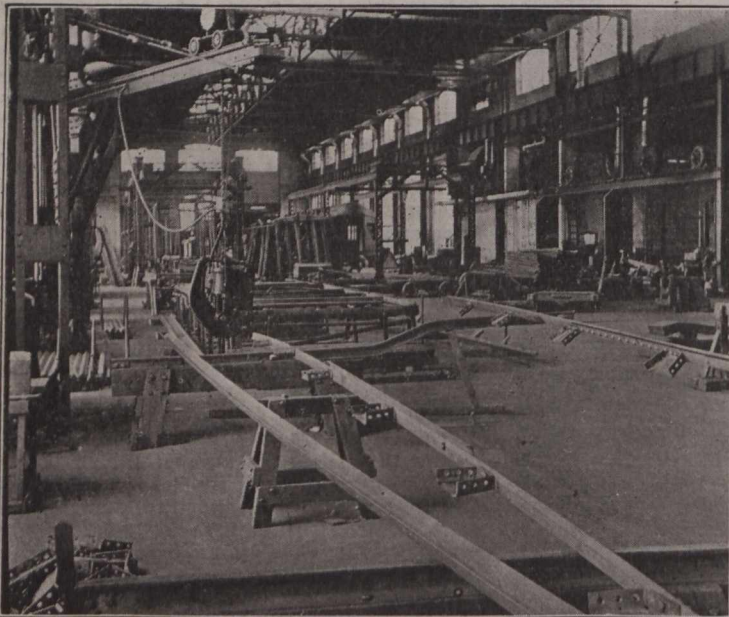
Assembling Parts for Steel Freight Car Side Rails.
